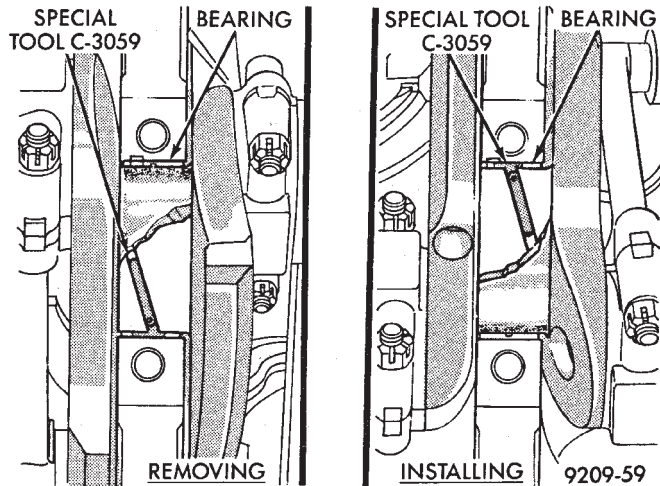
Upper Main Bearing Removal and Installation with Tool C-3059
